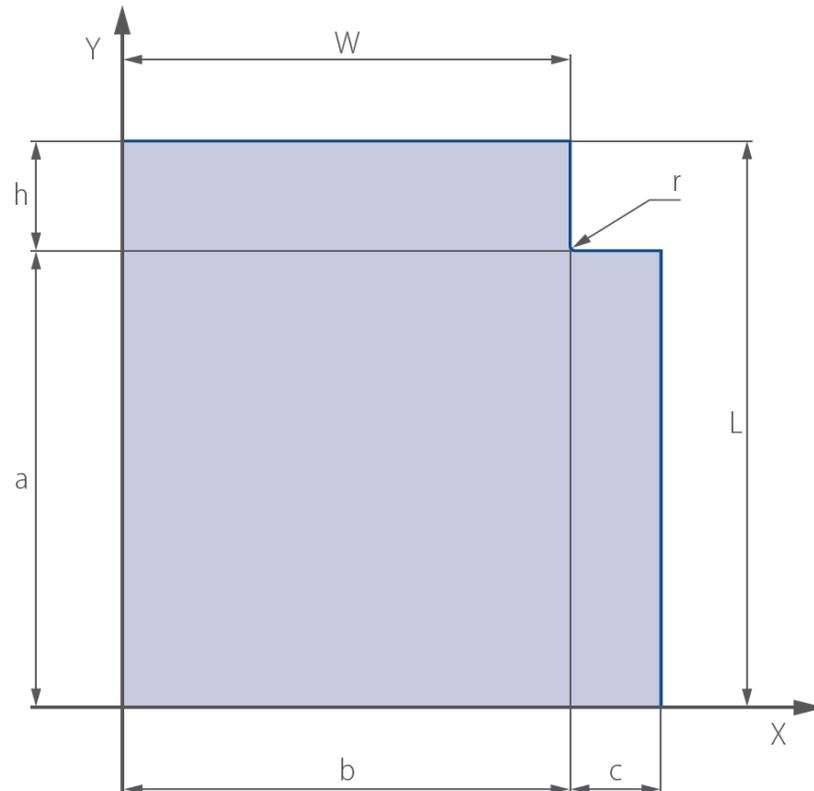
Example of a corner cut-out / notch plus relevant dimensions
